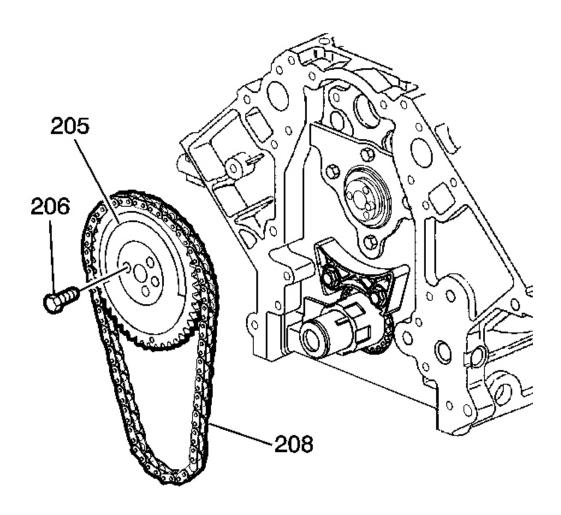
View Of Camshaft Sprocket, Bolts & Timing Chain Courtesy of GENERAL MOTORS CORP.
